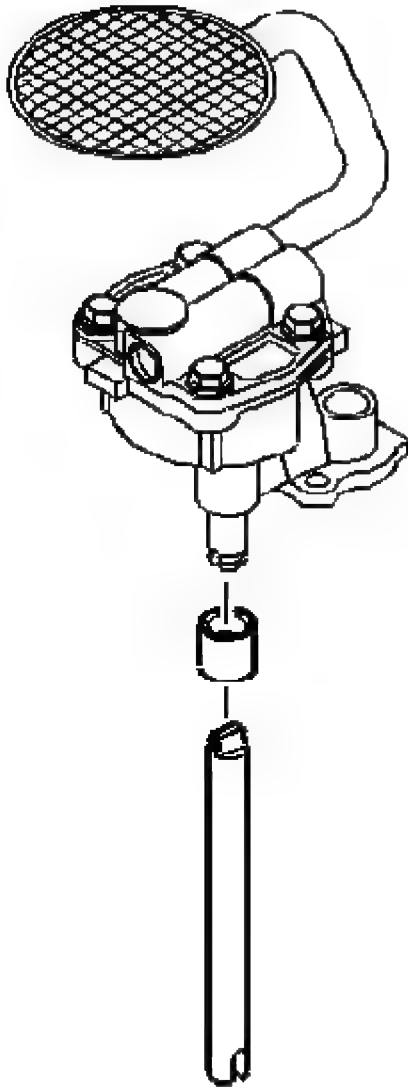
View Of Oil Pump Driveshaft & Oil Pump Driveshaft Retainer
